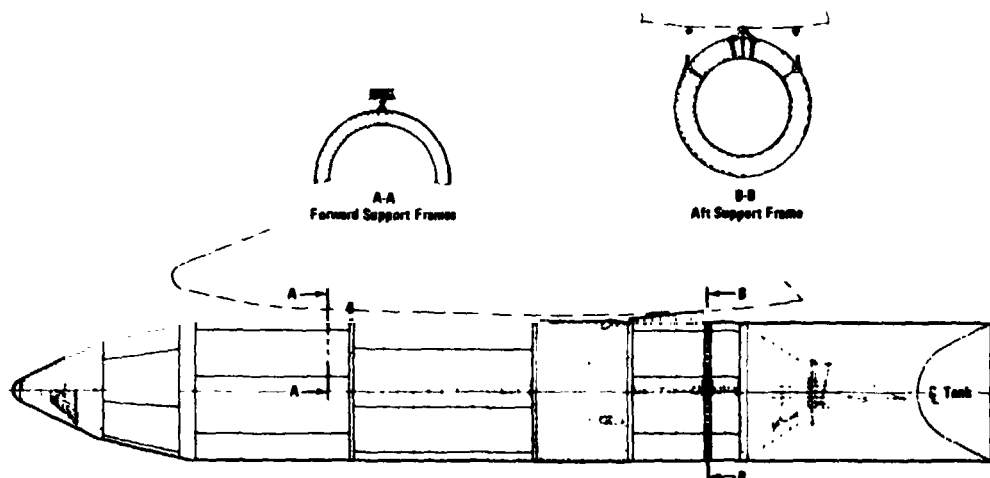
Structural Arrangement Swing Engine Design Ho Tank
